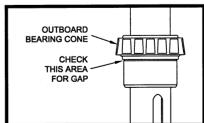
Checking for Zero Clearance with Feeler Gauge
